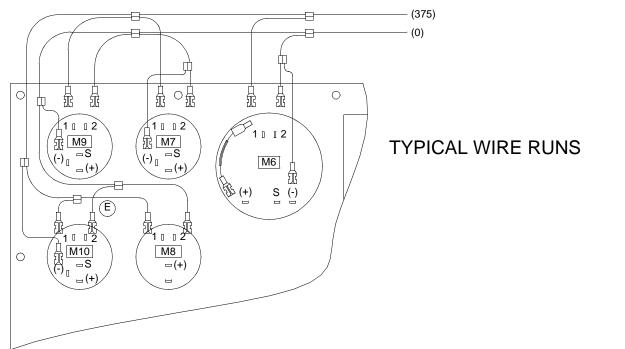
MCS Operator Cab Lower Control Panel Wiring.
